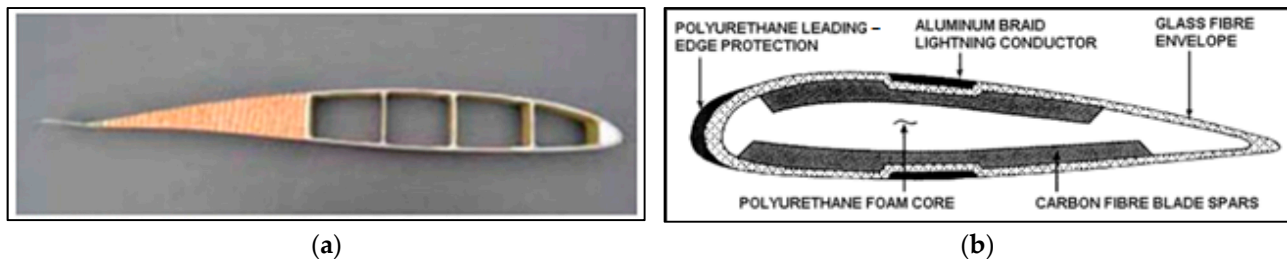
Examples of composite blades with similar inner structures. (a) AH-64 Apache rotor blade section [13]. (b) Dowty rotor composite propeller blade section [14].
